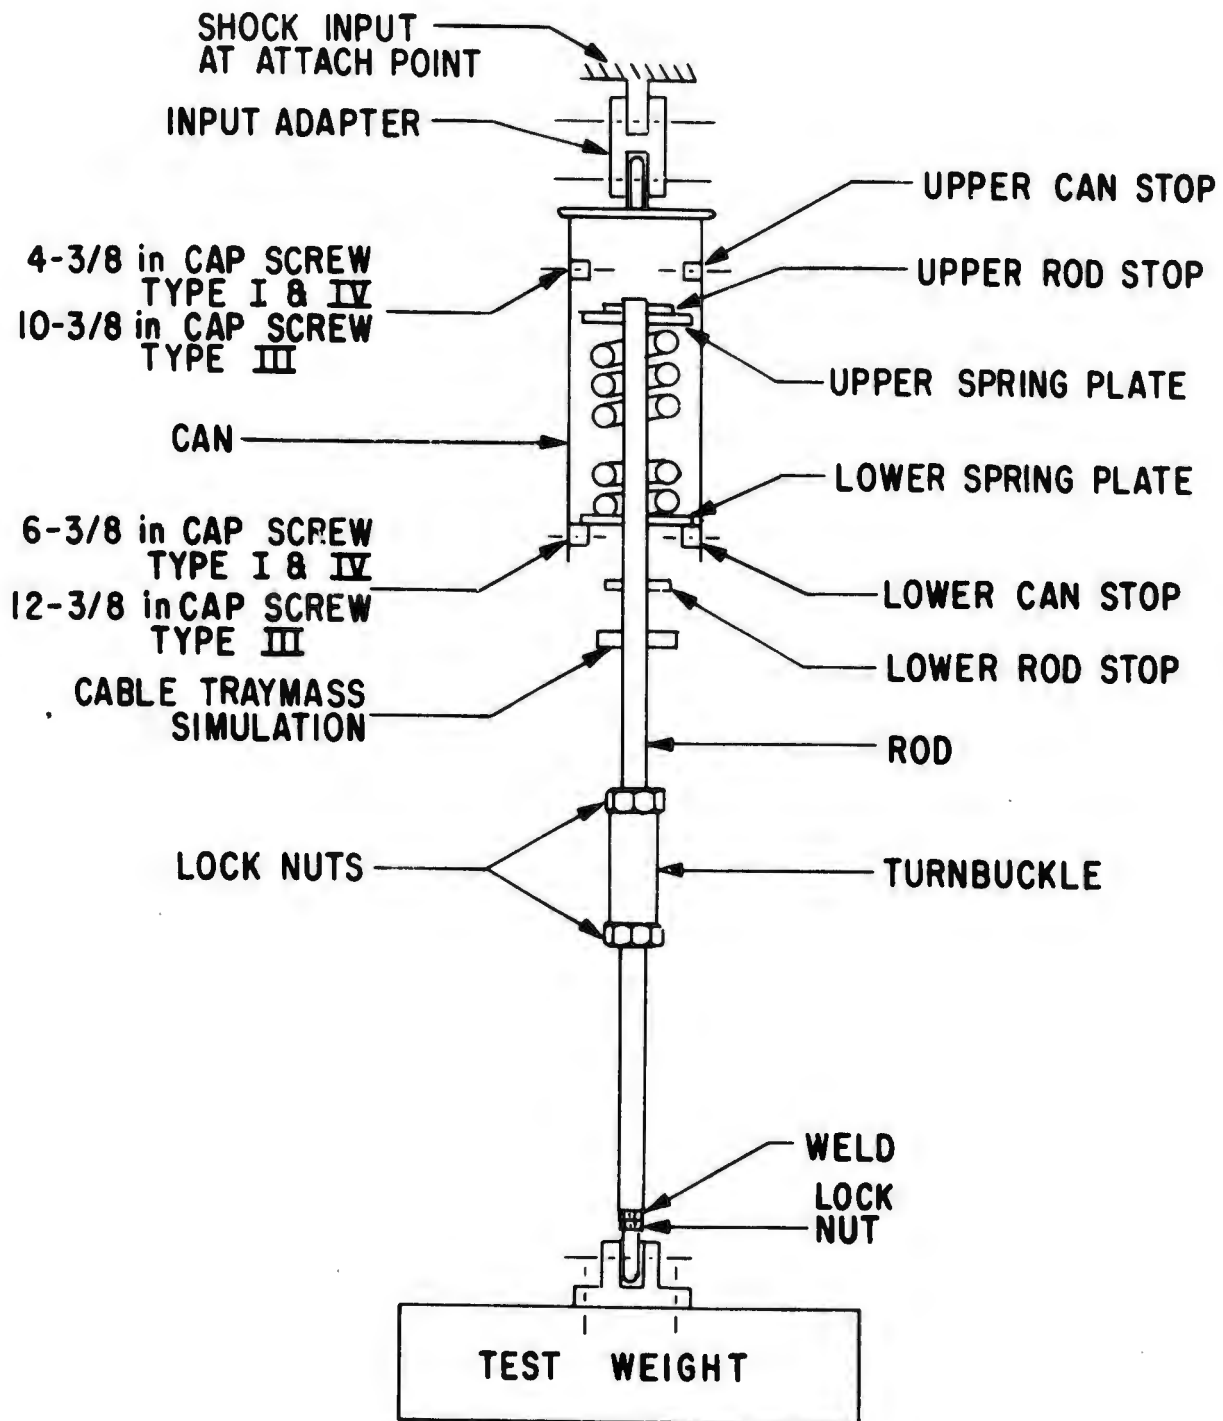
Wing I LER Isolator Assembly in Test Configuration
